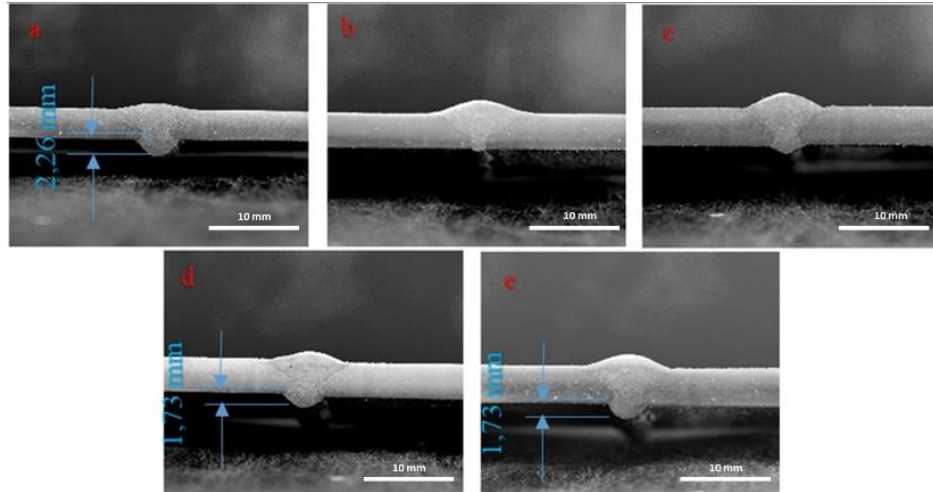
Macrographs of welded samples by robotic MAG welding method a) M1, b) M2, c) M3, d) M4, and e) M5 samples
